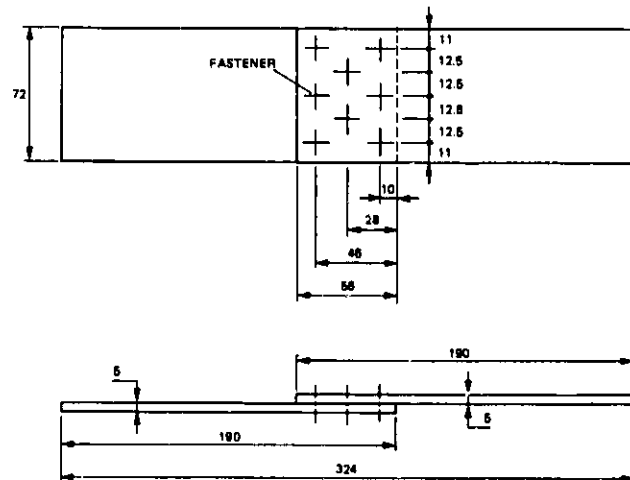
High load transfer double shear joint, type H1 - the Netherlands
